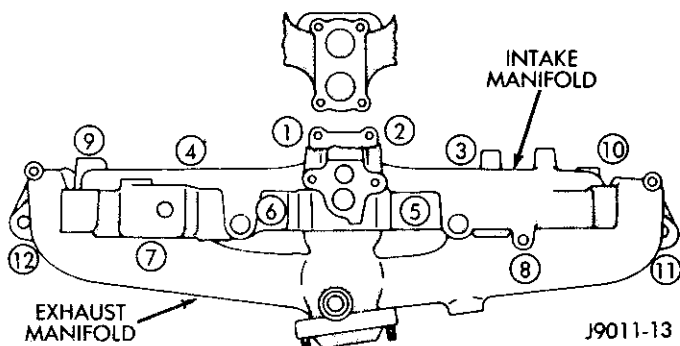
Exhaust/Intake Manifold Bolt/Nut Tightening Sequence
